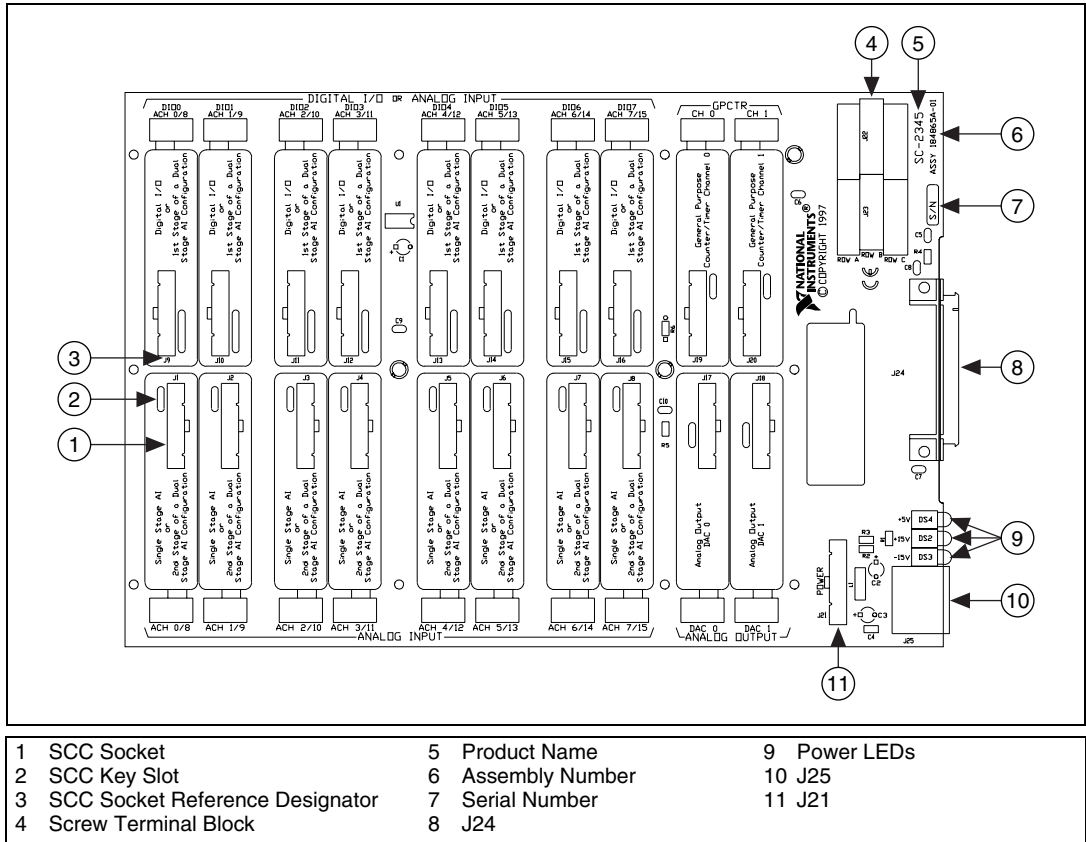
SC-2345 Configurable Connector (Side Cabled) Board Parts Locator Diagram
